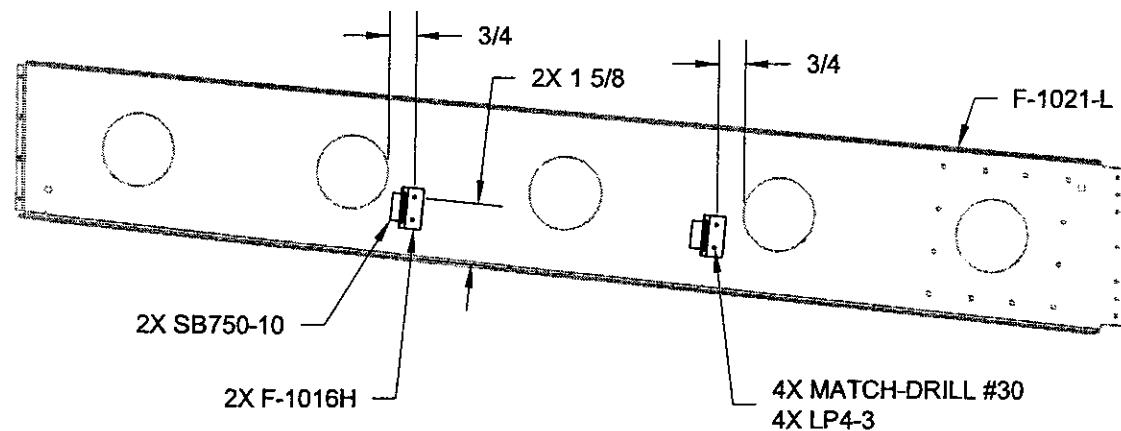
ATTACHING BRACKETS (LEFT SIDE VIEW)
